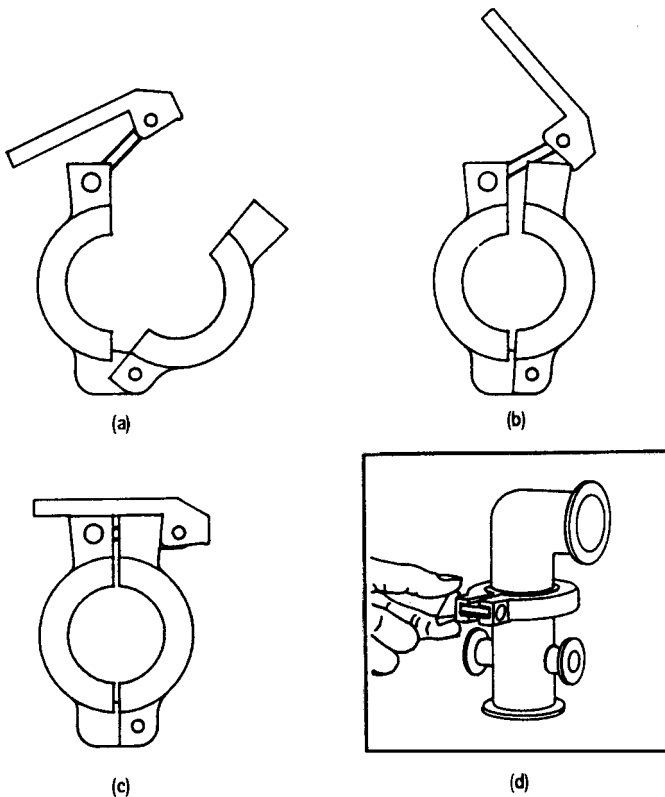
Hinged clamp joint. (a) Clamp open; (b) part closed; (c) closed; (d) completed joint.
